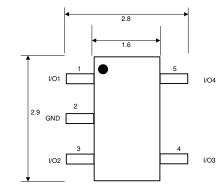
ESDS314 DBV Package, 5-Pin SOT23 (Top View)
